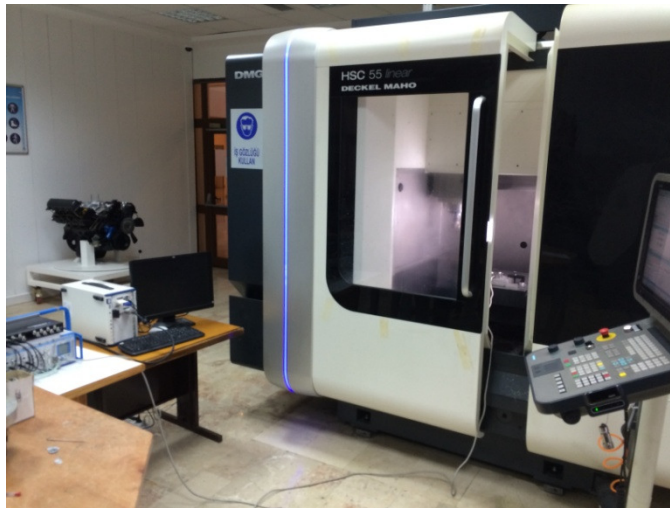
DMG HSC 55 three axis milling machine used in milling experiments.
